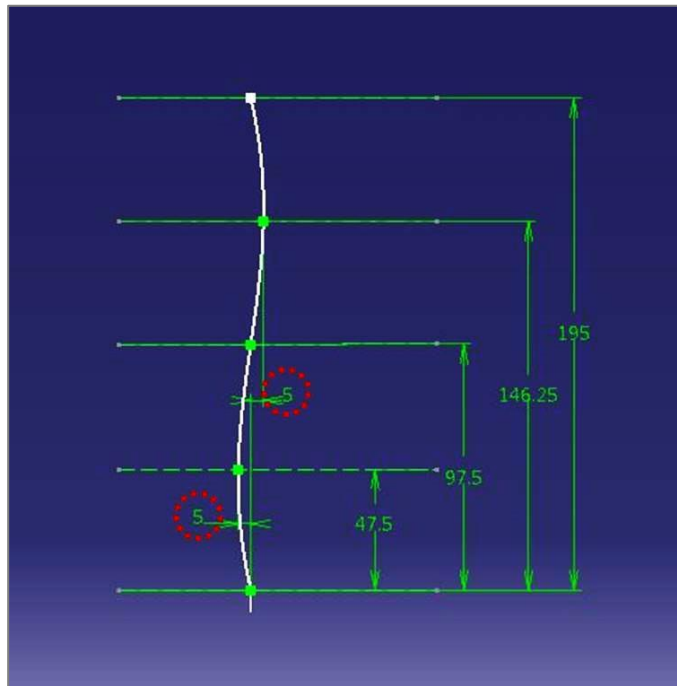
Drawing of Centerline Curvature of S-Shaped Coil Spring
